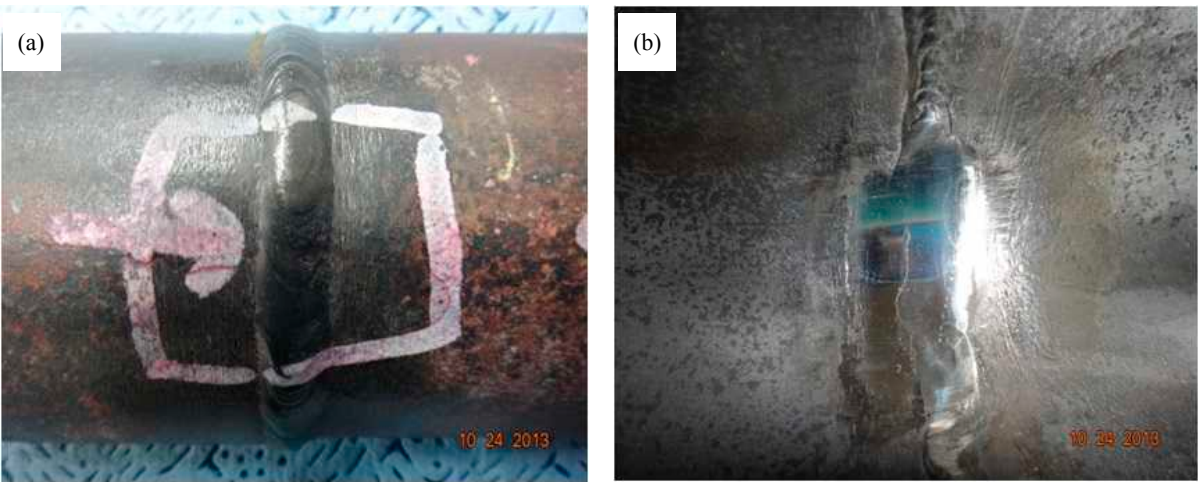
Failed welded joint of boiler tube exposed to 550 ~ 620°C for 8,400hrs
